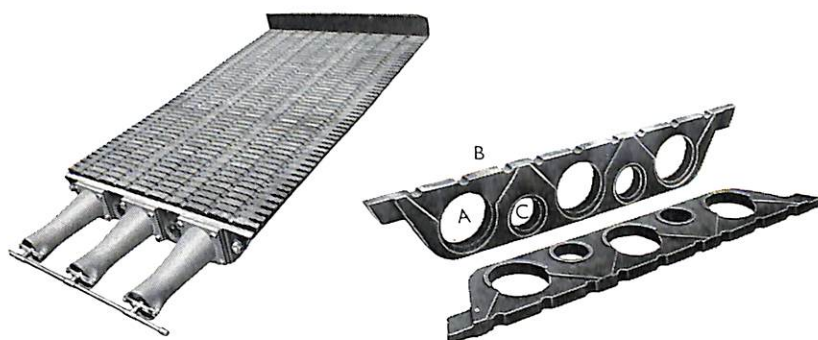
A furnace constructed of firebars ($\frac{7}{8}$ in. thick) fitted across the furnace tube.
